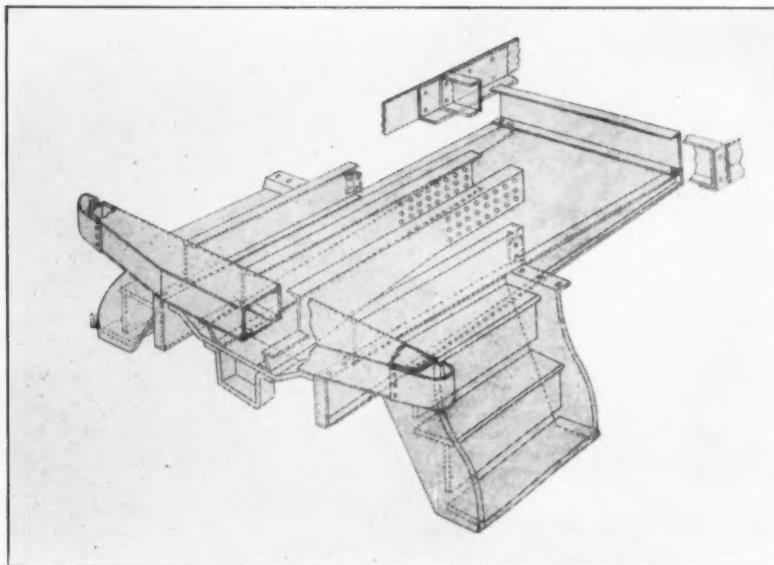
SKELETON OF PLATFORM MEMBERS FOR ALL-STEEL CONSTRUCTION
